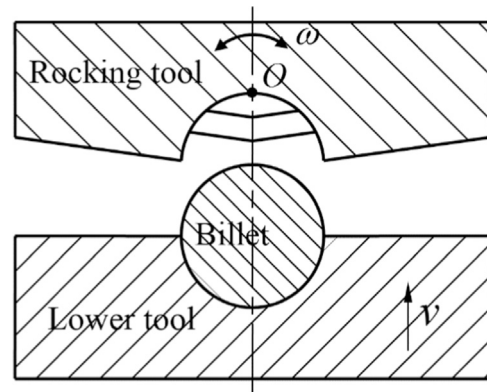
Schematic diagram of cold orbital forging of gear rack under straight line path.
